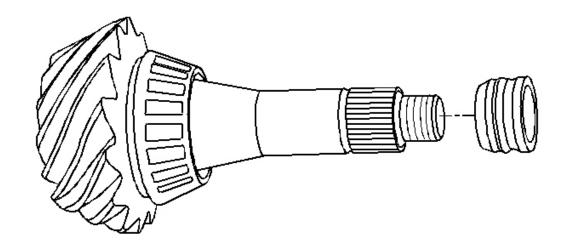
View Of Collapsible Spacer & Pinion Courtesy of GENERAL MOTORS CORP.
